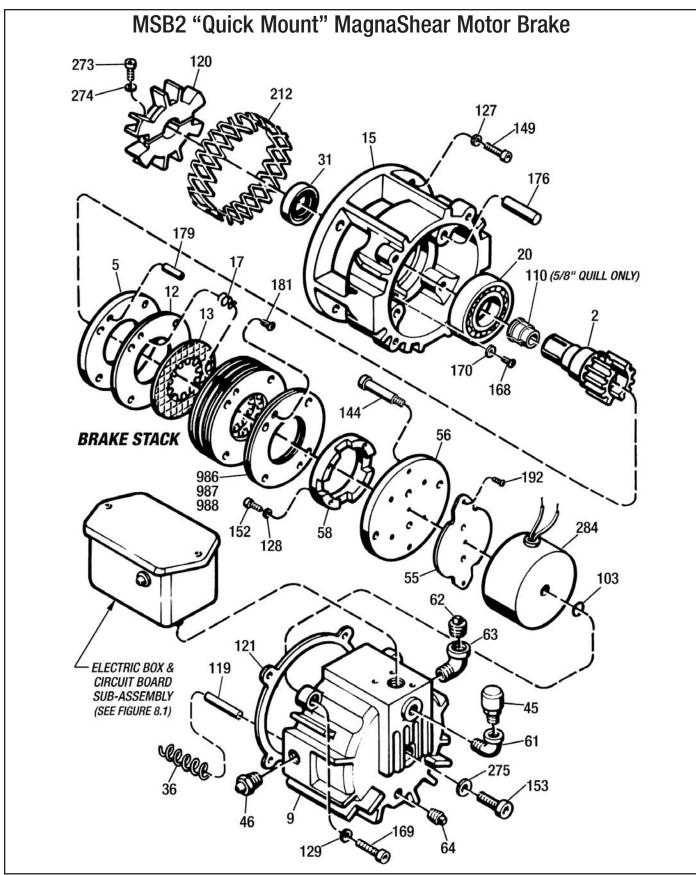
MSB2 "Quick Mount" MagnaShear Motor Brake
